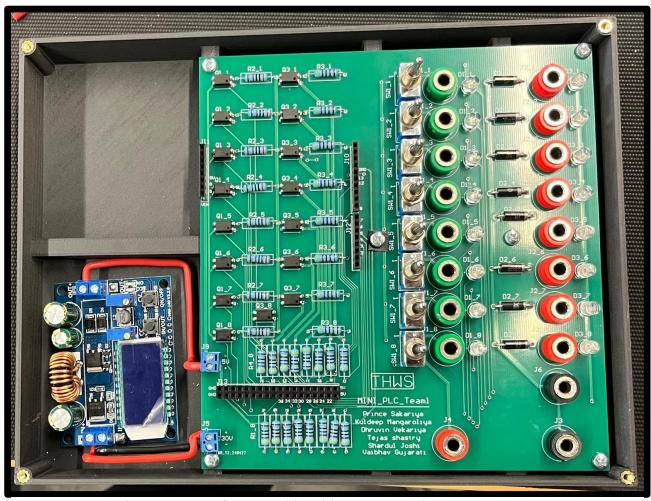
PCB after assembly with DC-DC Buck Boost converter.
